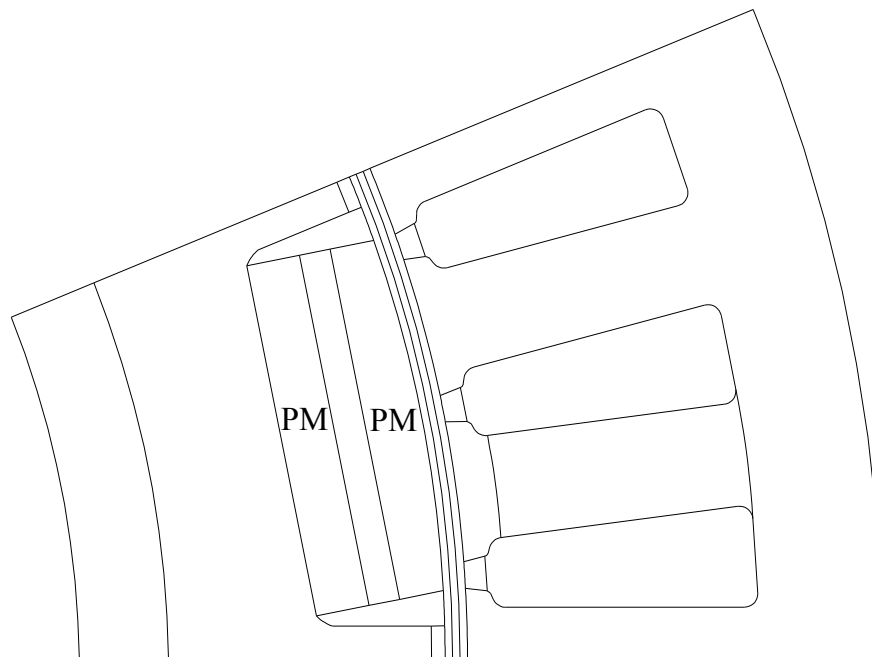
MM machine pole geometry with a glued magnet pole structure.
